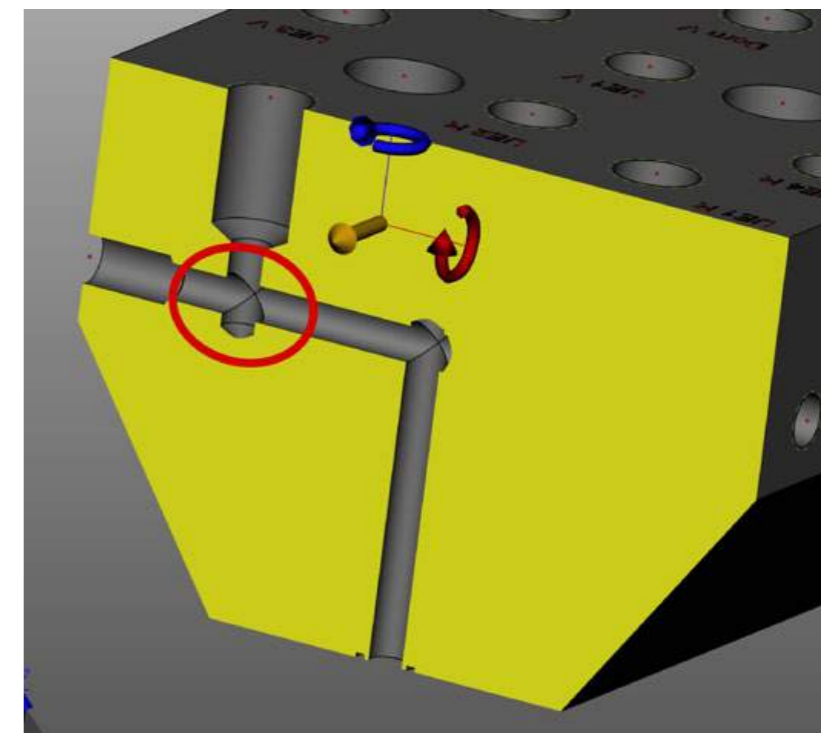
Hydraulic/Adapter Blocks: conventional manufacturing issues
